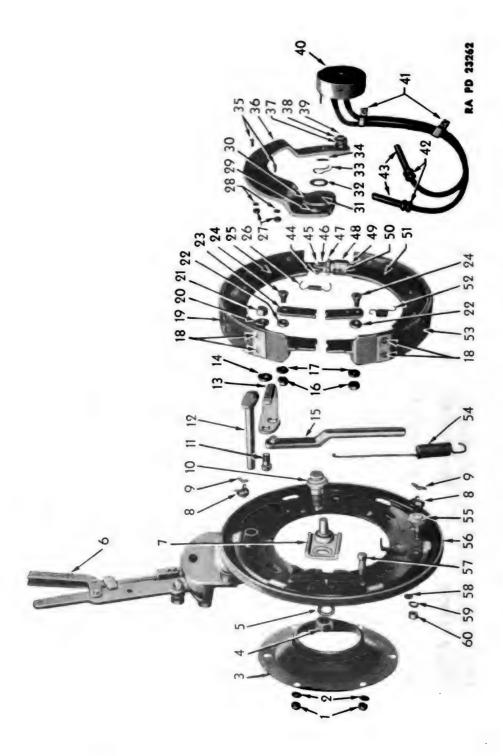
Hand and Electric Brake, R. H.—Exploded View
